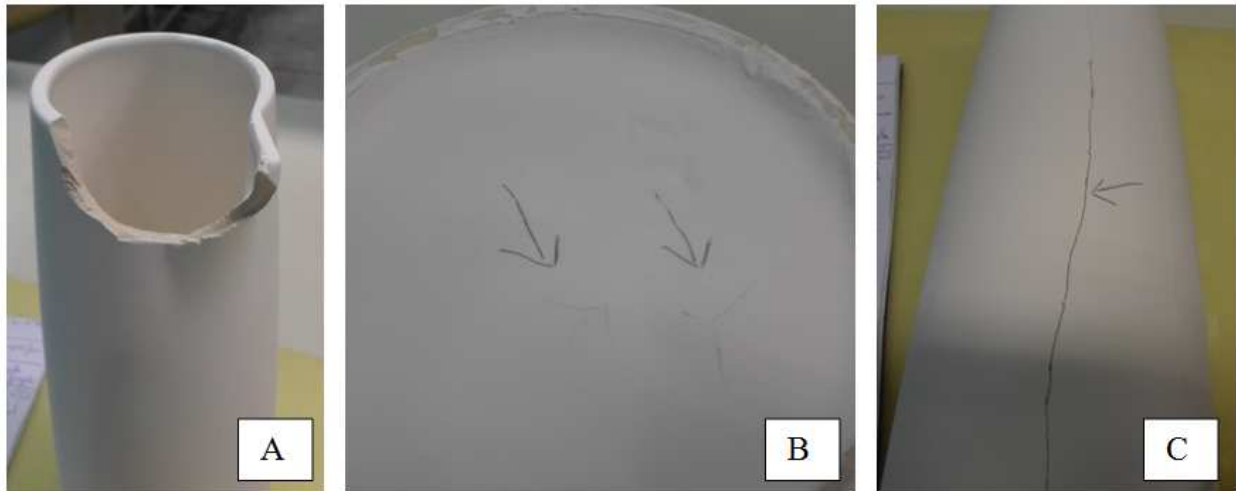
Defects observed during the glazing step for slip casting pieces
